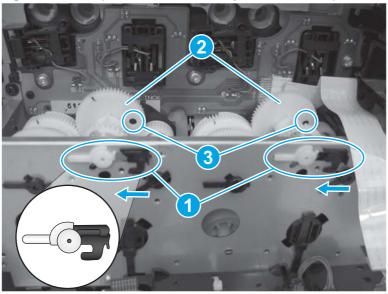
Replace the toner-cartridge drive assembly or the main drive assembly (1 of 8)
